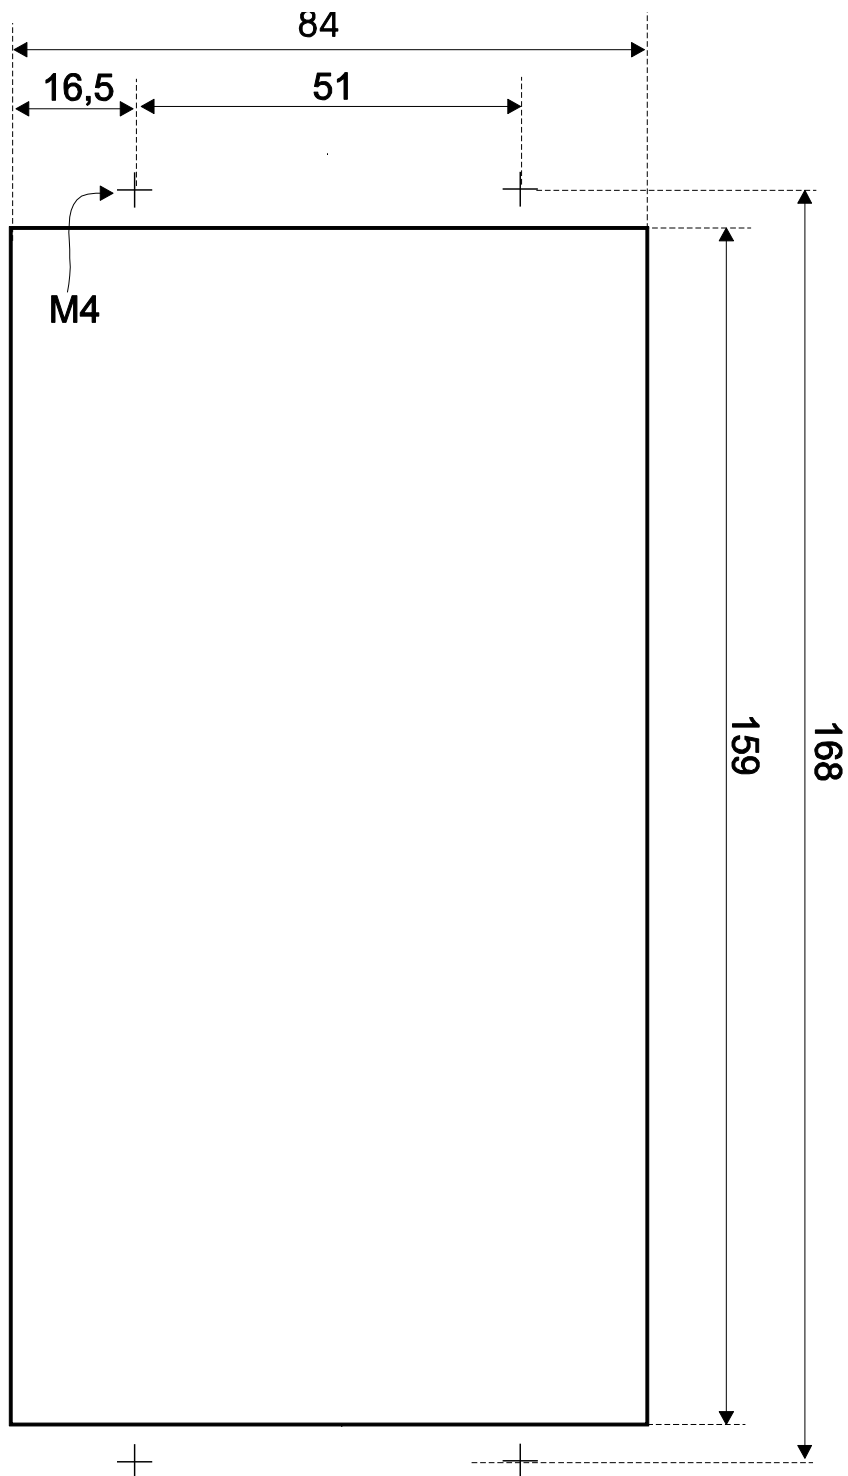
AQ 110 dimensions in millimeters (side view)
